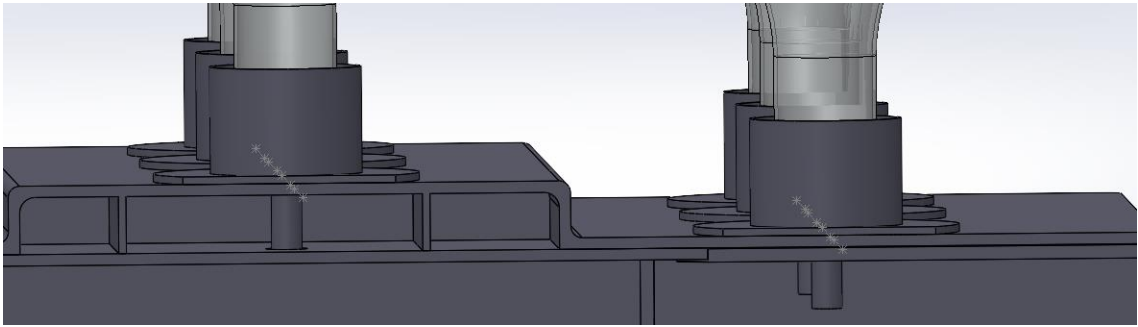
The bottle holder and bottle adapter connection with the main housing with screws.
